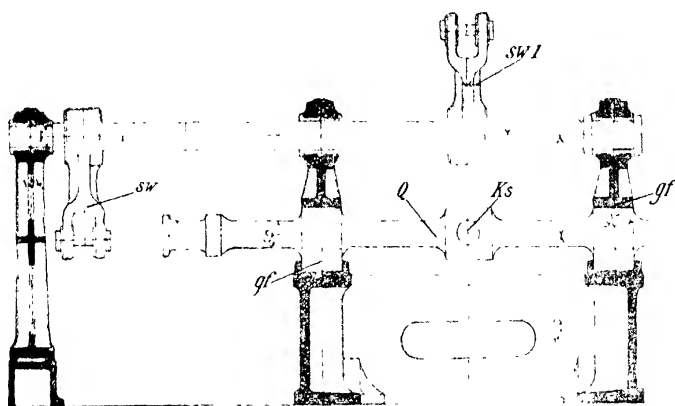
Section through the cross head and valve rod of the engine of an Exter press magnified from Plate IV.
